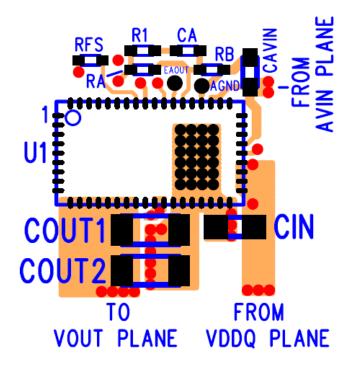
Top PCB Layer with Critical Components and Copper for Minimum Footprint
